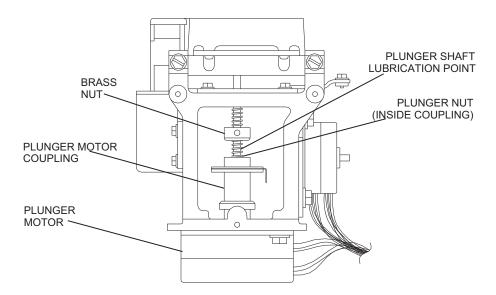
Plunger Shaft Threads and Plunger Nut Lubrication
